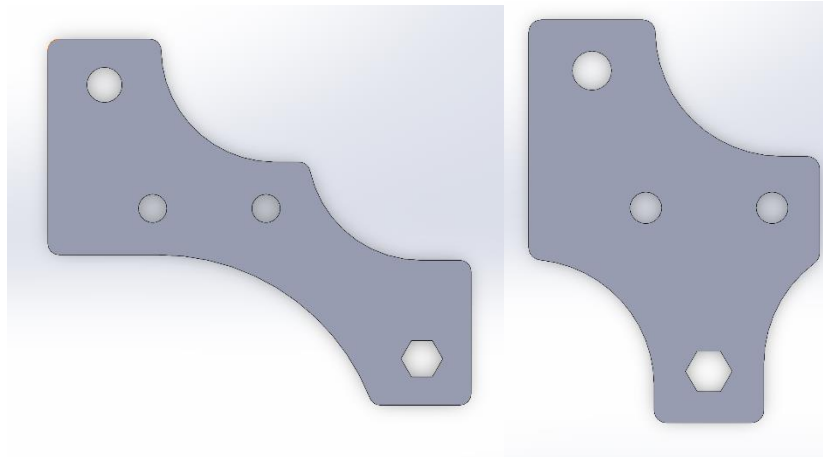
SolidWorks Models of Offset Gear Position 1 and 2
